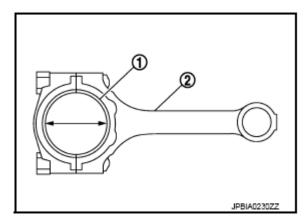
Identifying Connecting Rod Bearings And Connecting Rod Courtesy of NISSAN NORTH AMERICA, INC.
